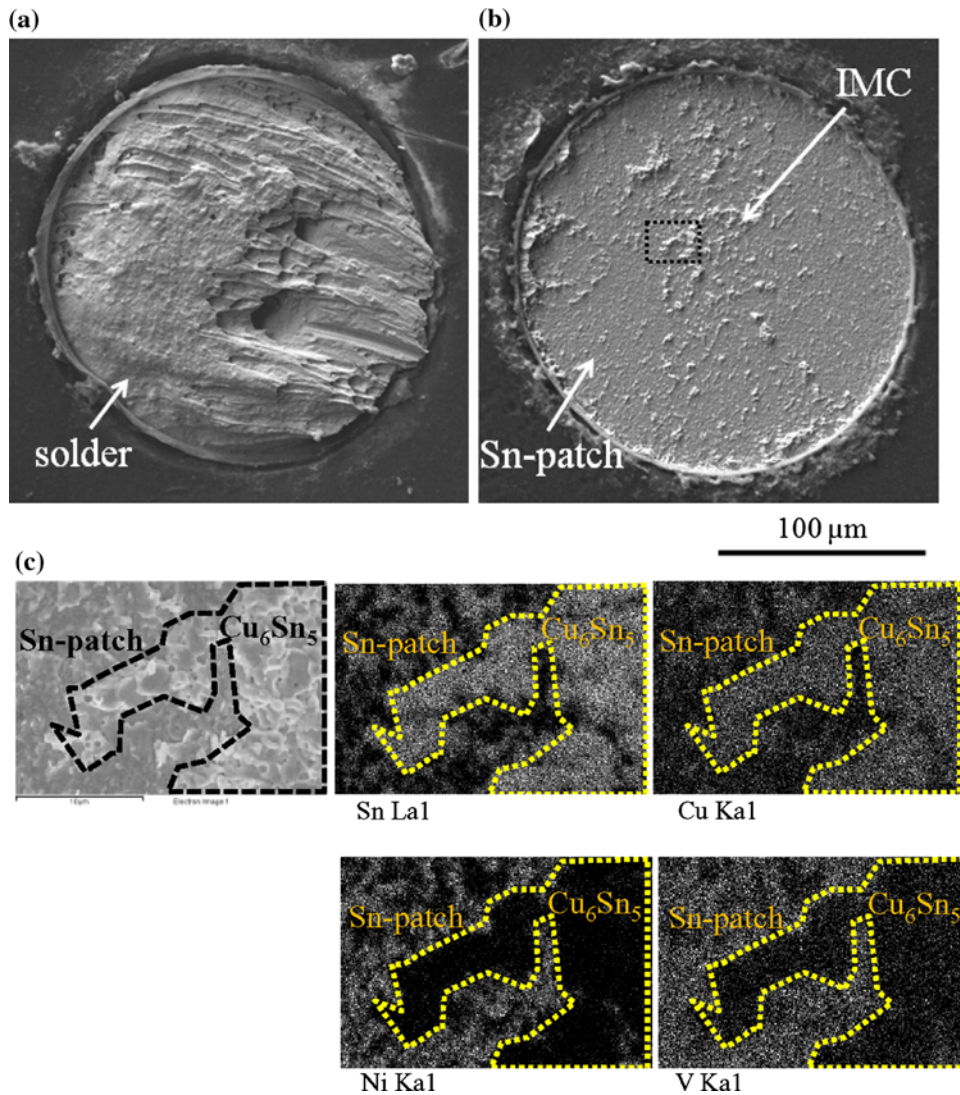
FE-SEM images of (a) ductile and (b) brittle fracture surfaces of Sn-Ag-Cu solder joints with UBM 15, and (c) x-ray mapping of the magnified image marked in (b) after aging at 150°C for 250 h.
